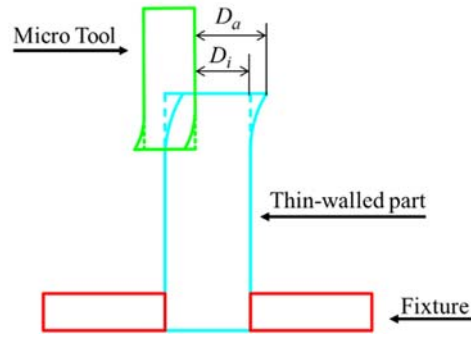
The deflection of thin-walled micro part and micro-milling tool
